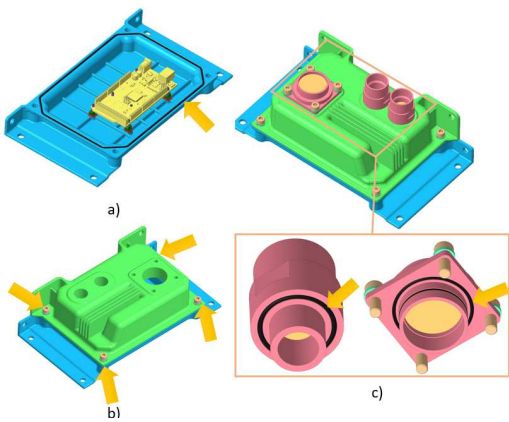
Waterproofing method: a) rubber seal positioned in the lower part's groove, b) position of the screws, c) rubber seals of the main connector (bottom right) and secondary connectors (bottom left).
